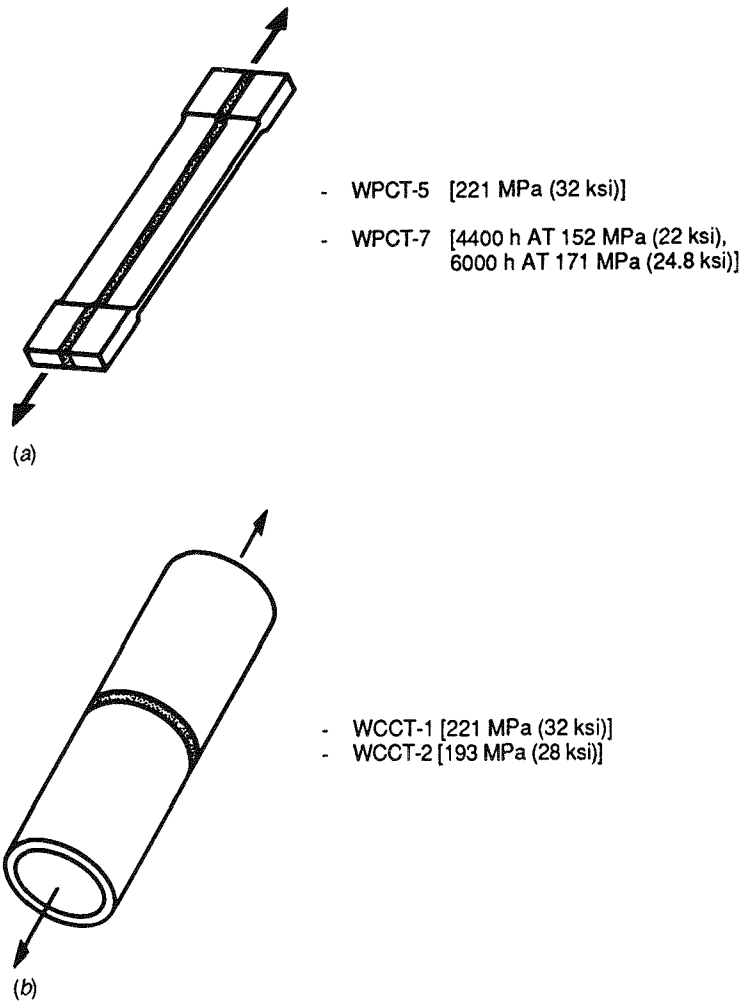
Four failure tests of 316/16-8-2 structural weldments.
